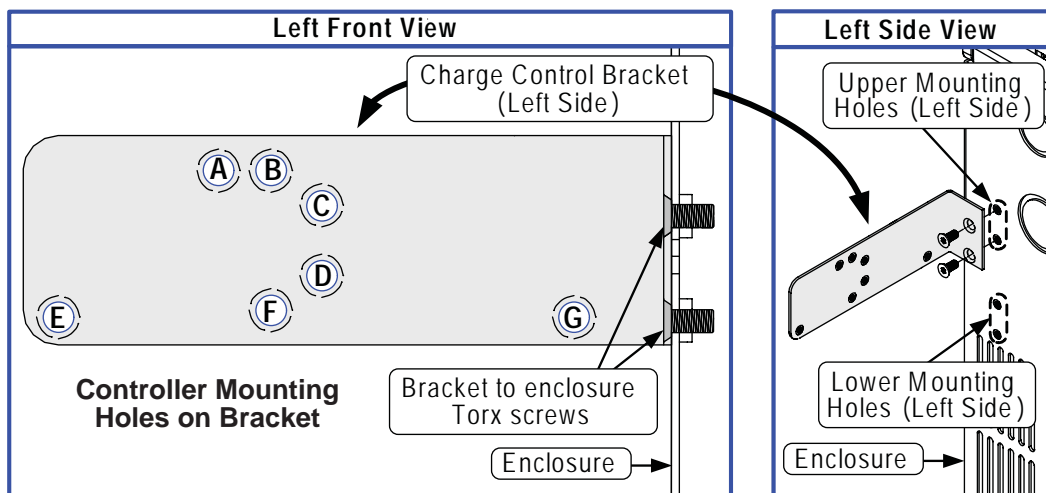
, Holes Used to Mount Bracket on Left side of Enclosure
